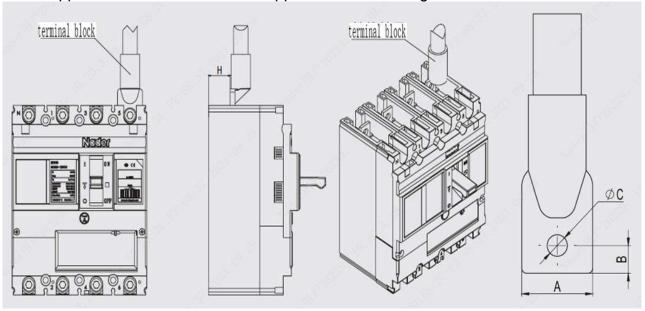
Connection diagram of copper bar in front of board or copper cable with wiring terminal
